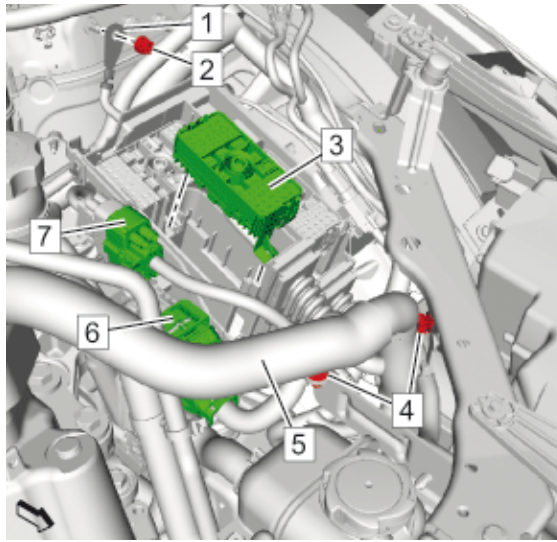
Ground Cable, Nut, Engine Wiring Harness, Clips And Electrical Connectors
